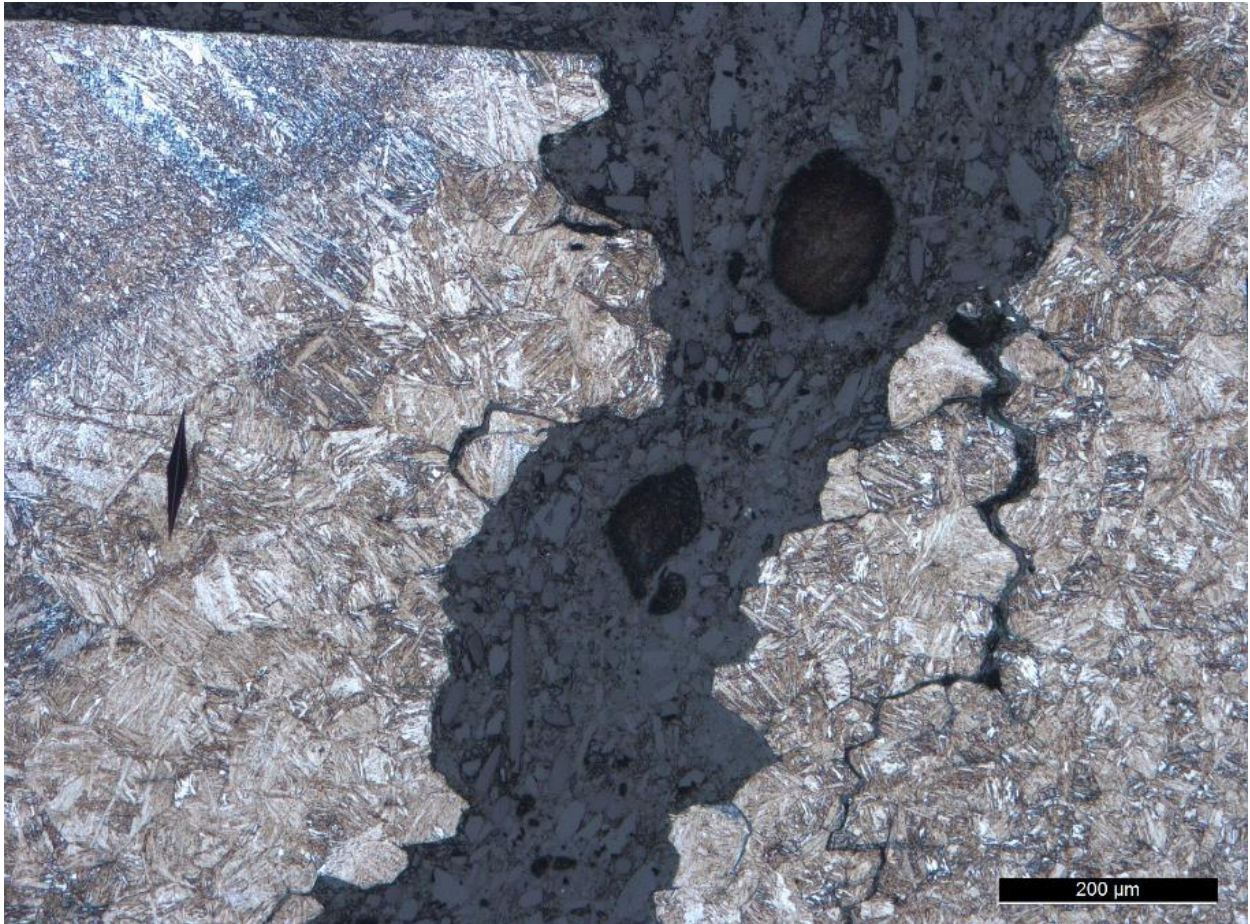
Core Sample SA008E at weld toe. A Knoop hardness indent is shown adjacent to the crack – 100X magnification.
